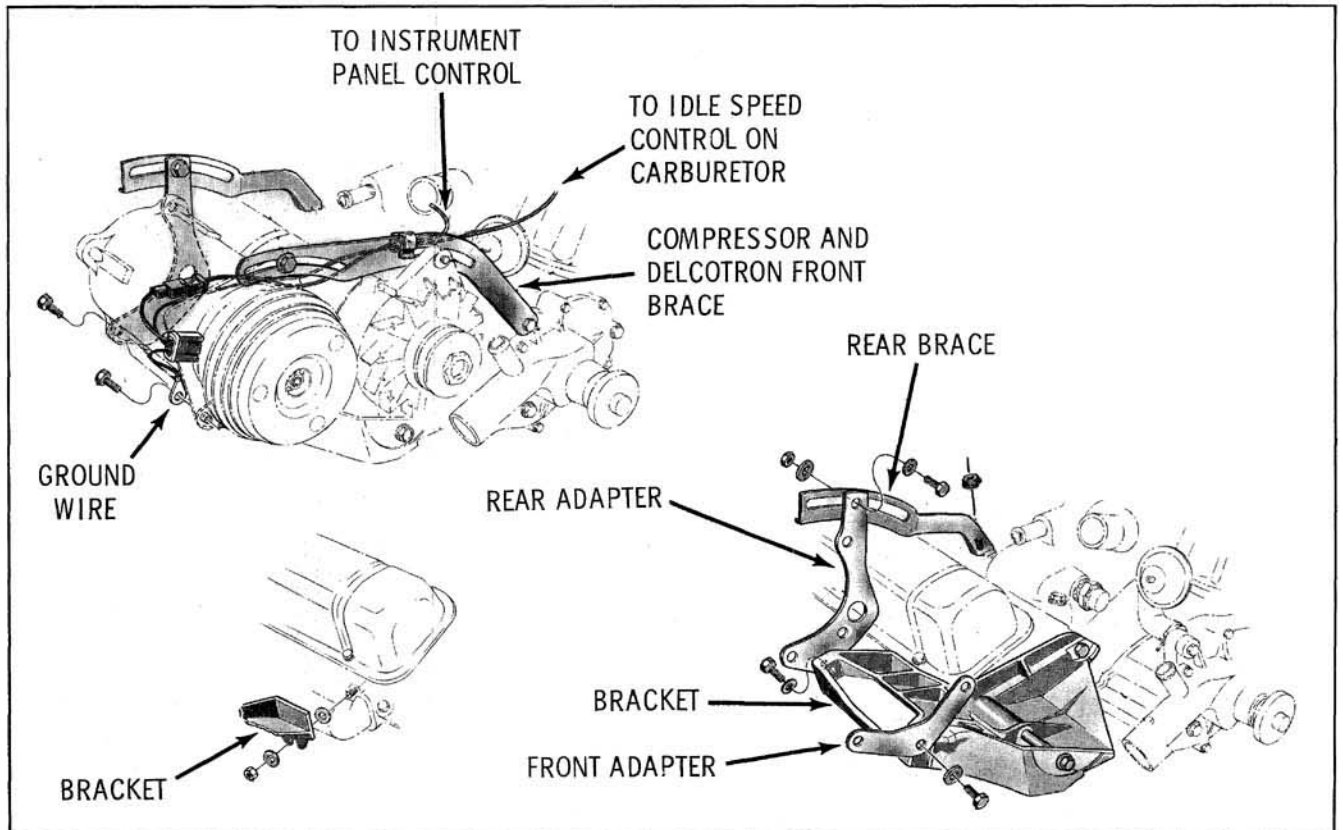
Compressor Mounting V-6 (33 and 35 Series)
